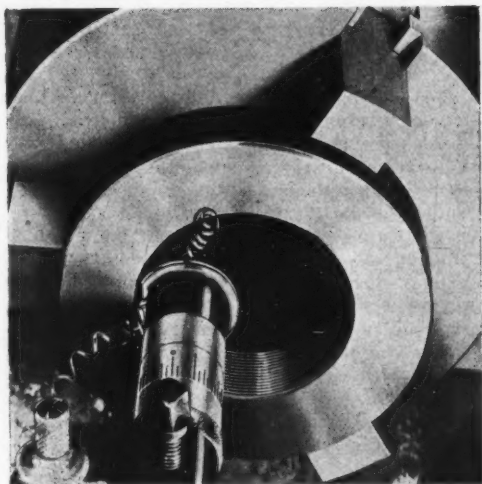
MP tools of the type here shown are supplied for cutting internal threads
